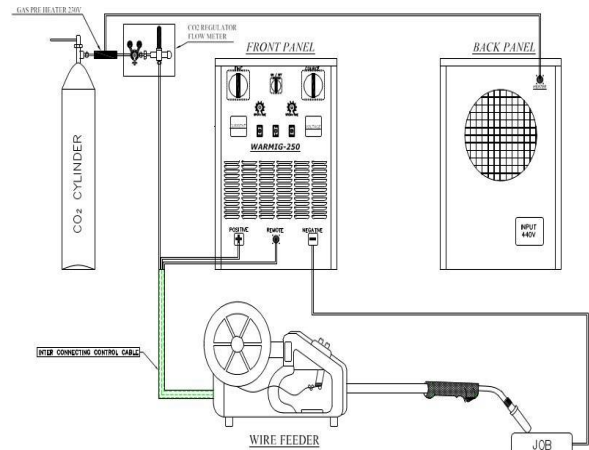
Gas Metal Arc Welding (GMAW or MIG)
